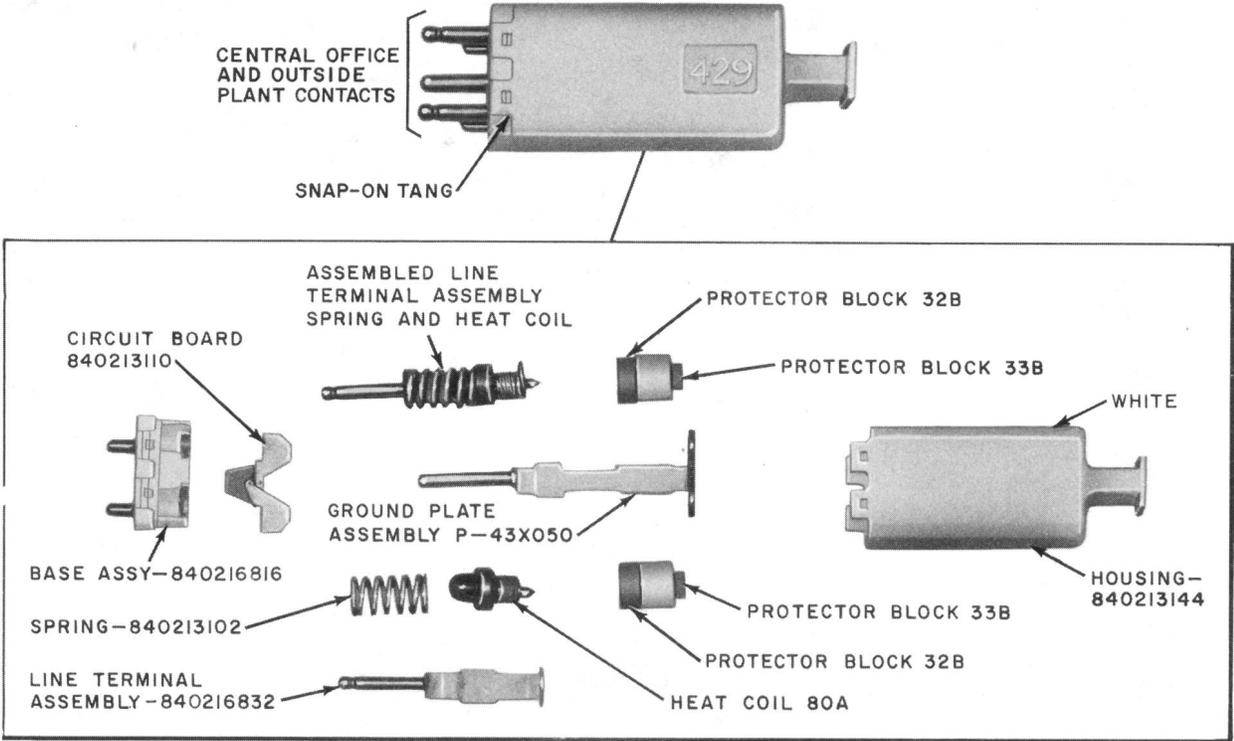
429F Plug Units (For 302-, 303-, and 305-Type Connectors)
